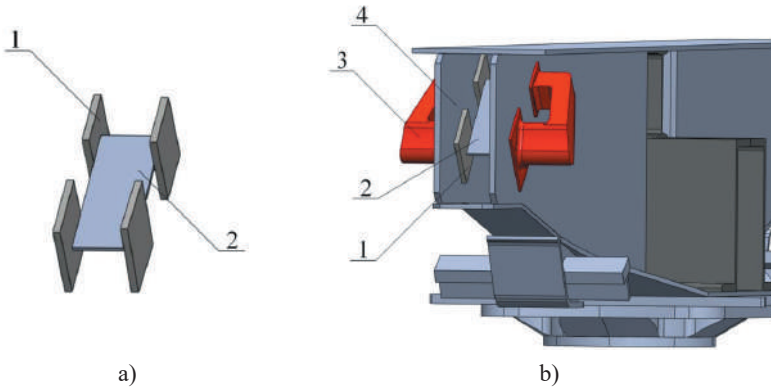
Reinforcement for the bolster beam section of an open car:
